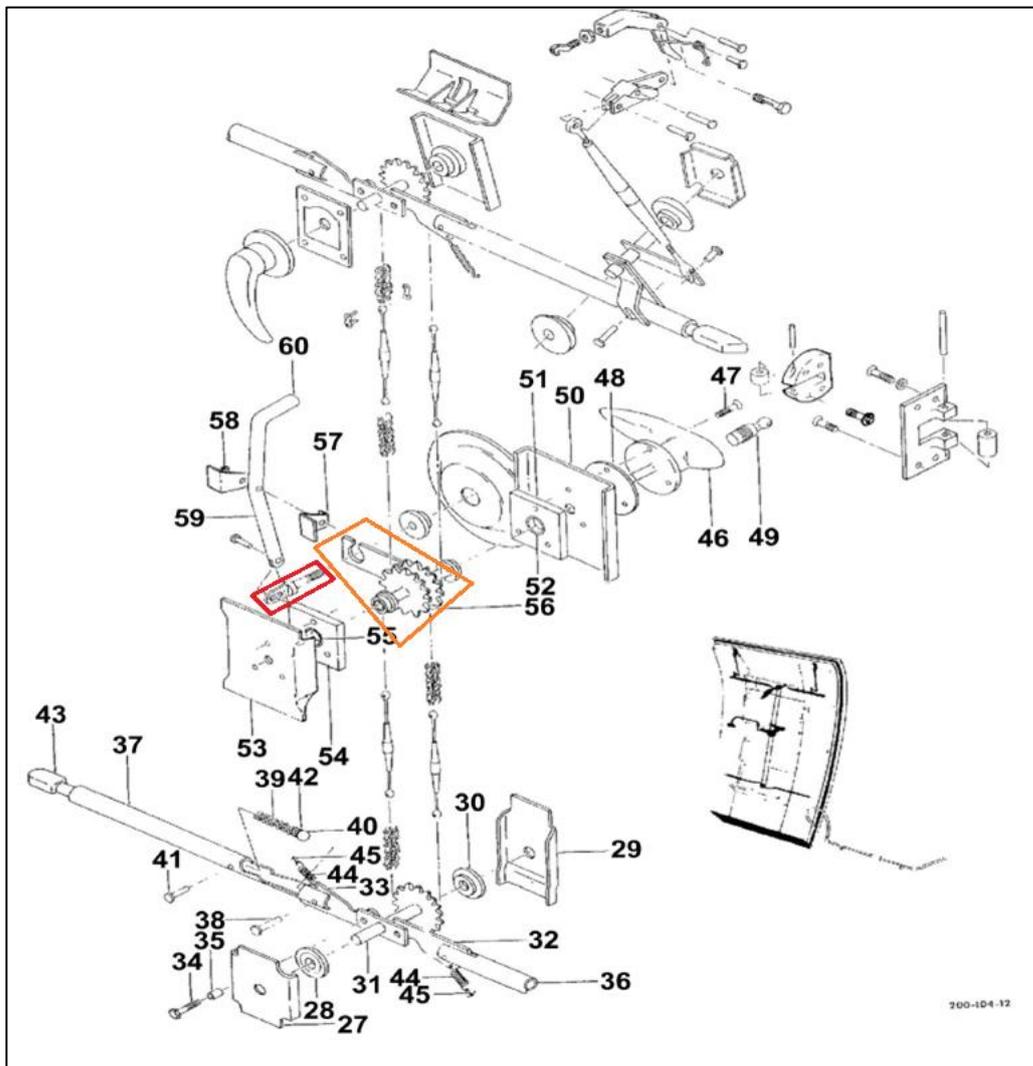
The bolt (in red) and braze arm assembly (in orange).
